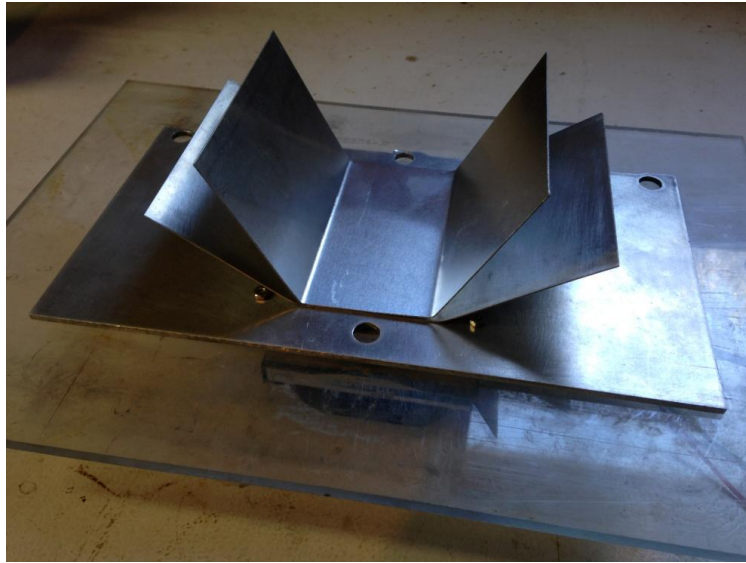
Fanned plate collection surface attachment on the TEC prototype.
